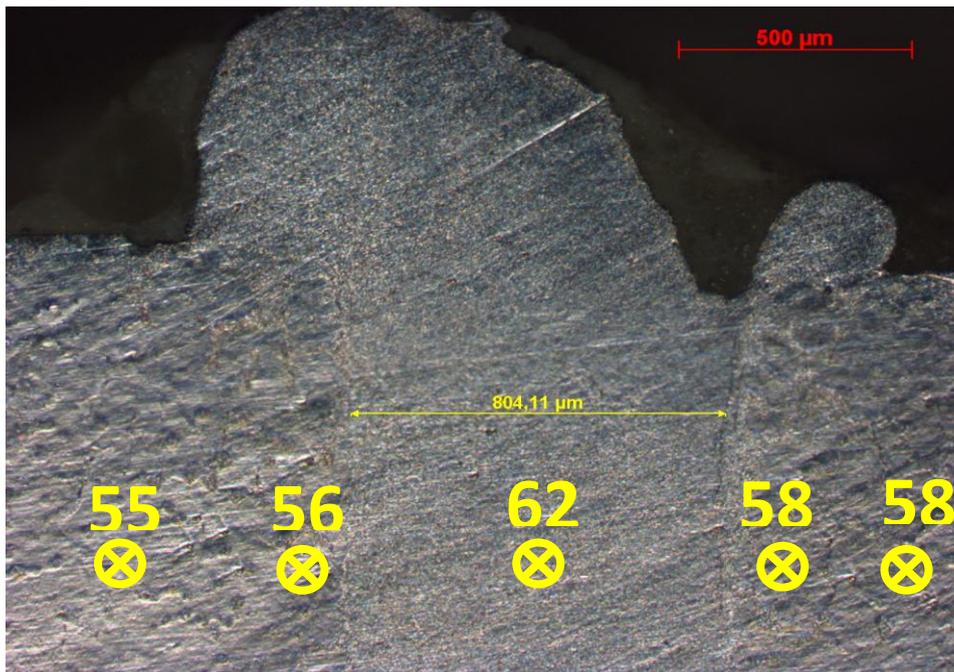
Electron Beam Welded Joint, AM 60, No Filler Material, Cross-section View
